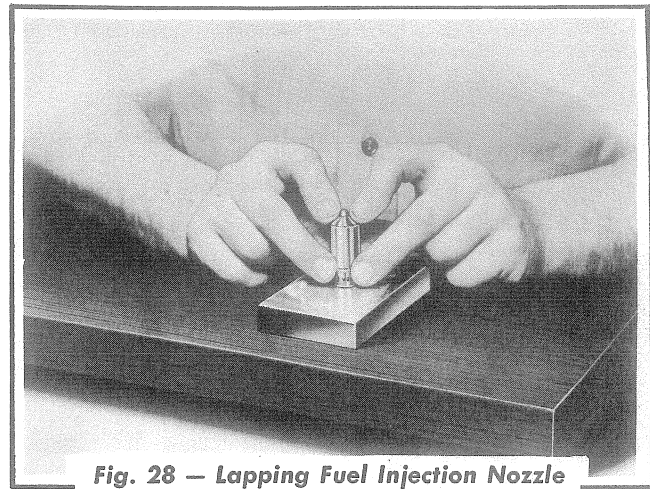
Lapping Fuel Injection Nozzle Valve Body
